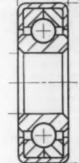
Cross section of No. 302 stainlesssteel ball bearings.
